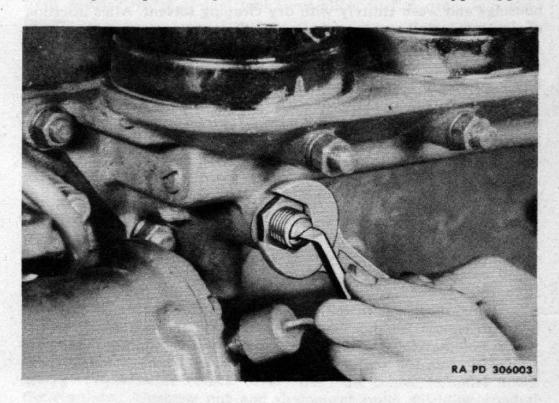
Adjusting Oil Pressure, Using Screwdriver 41-S-1400
